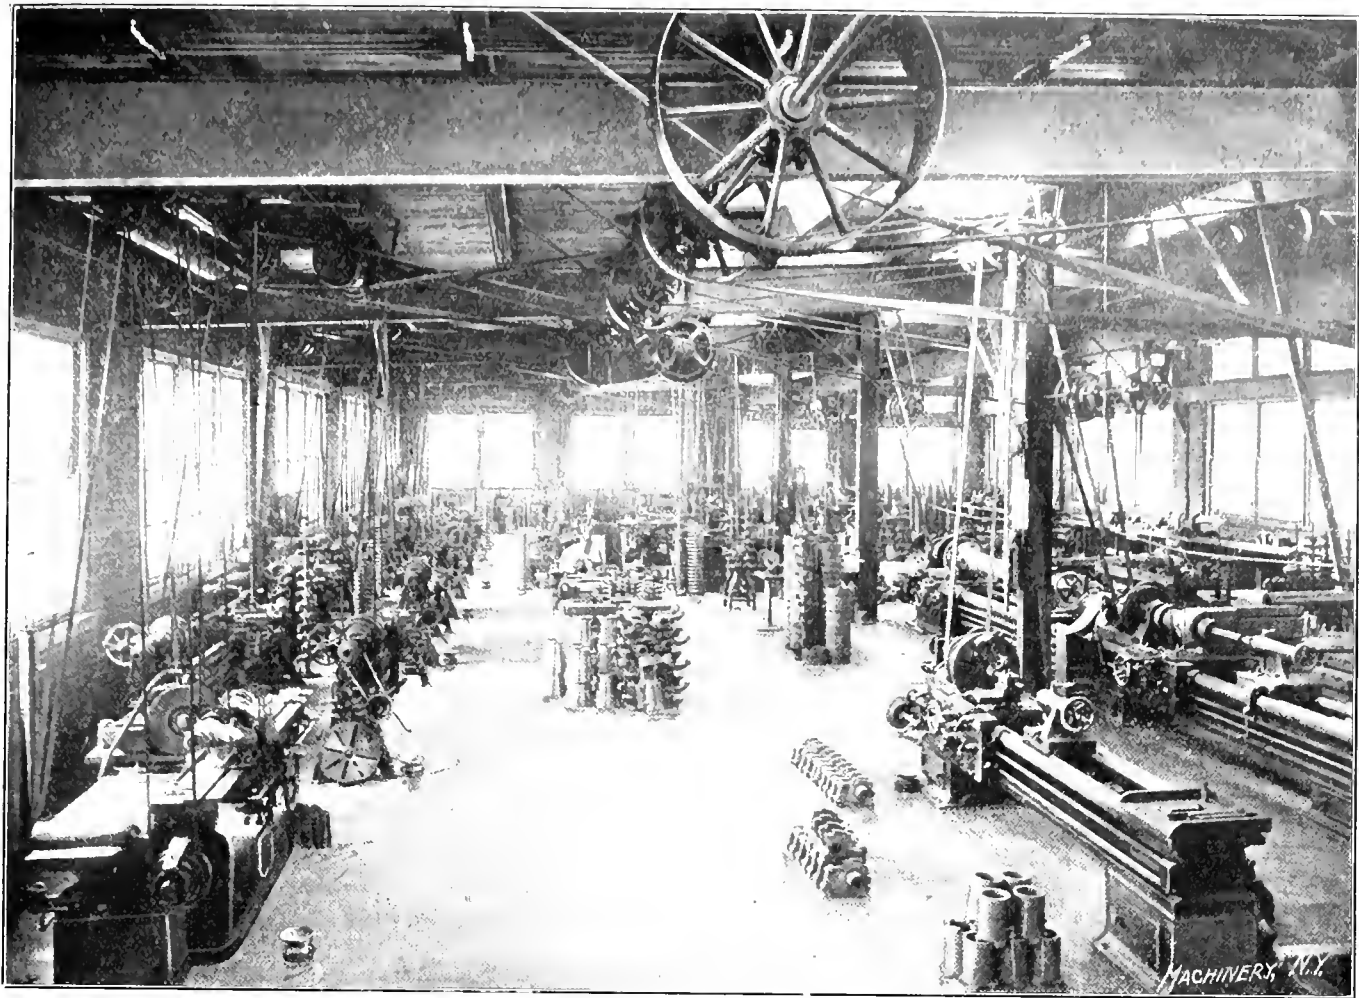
View of the Machine Tool Department of The Mueller Machine Tool Company.
